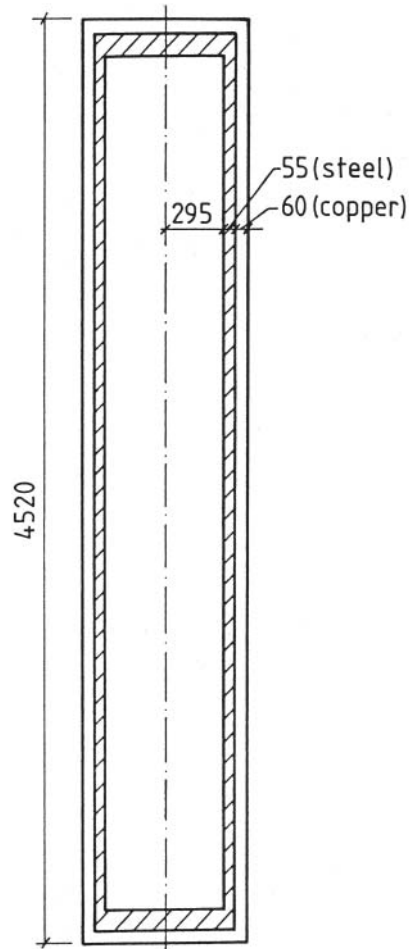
Geometry of the double-walled copper/steel canister (mm). The end plates of copper are welded to the copper cylinder.
